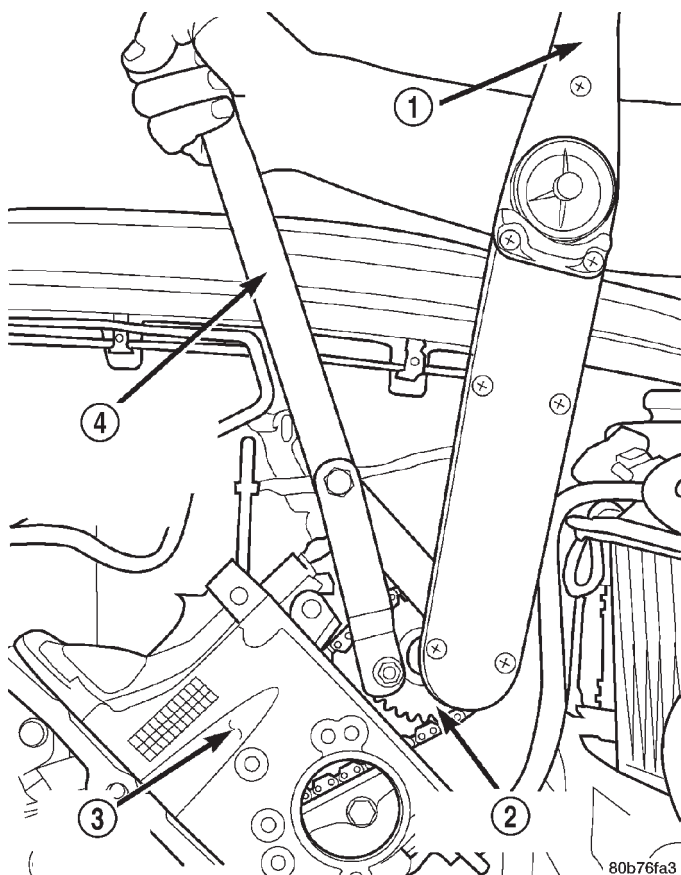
Tightening Left Side Camshaft Sprocket Bolt
